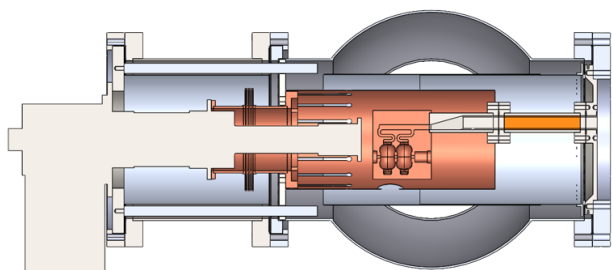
Cross section of planned cryostat addition to LANL test facility to house 2-cell structure for breakdown tests at 40 K.
